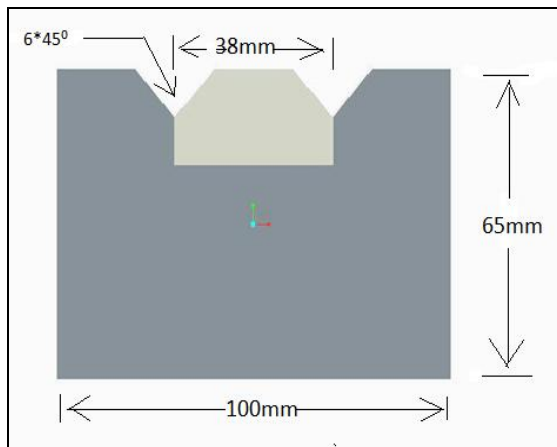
Hydraulic Shearing Machine Pressure Plate Square.
